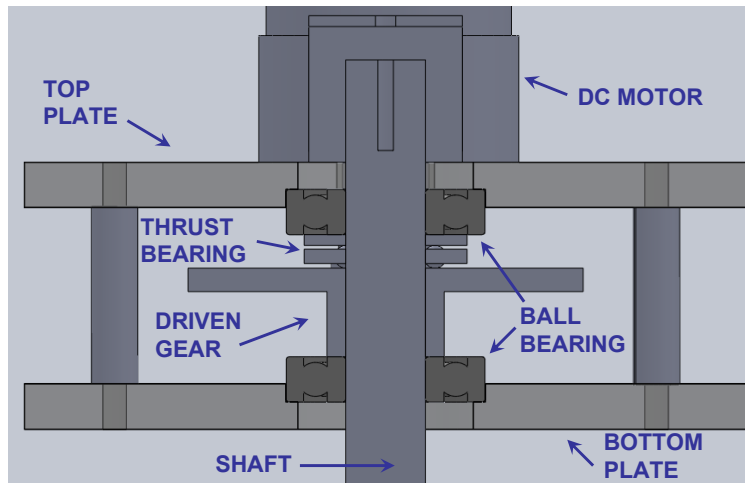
Detailed view of a section of the mechanical transmission. Ball bearings provide reactions to the thrust on the gear from the pinion during the motion. The thrust bearing decouples the driven gear from the outer and inner ring of the upper bearing. Structural stiffness is provided by the fastened top and bottom plate.
